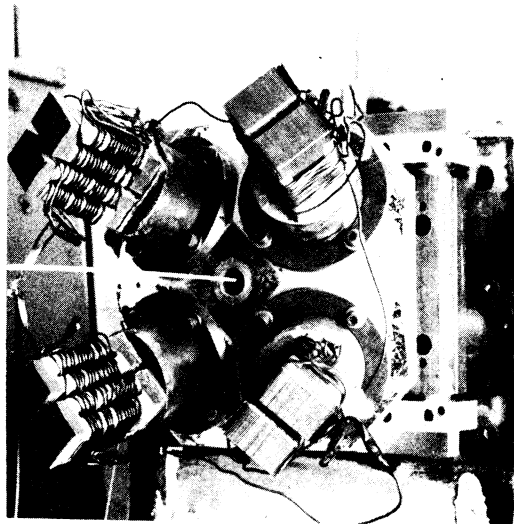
Quadruple magnetostrictive transducers mounted with wire passing through plate and die.
